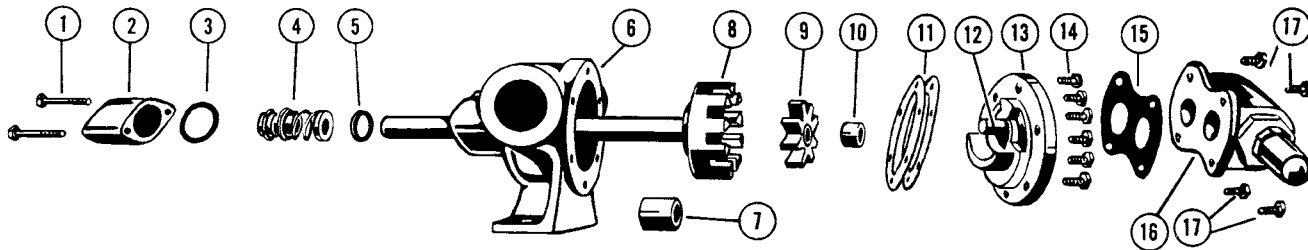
EXPLODED VIEW MODEL G432 PUMP
